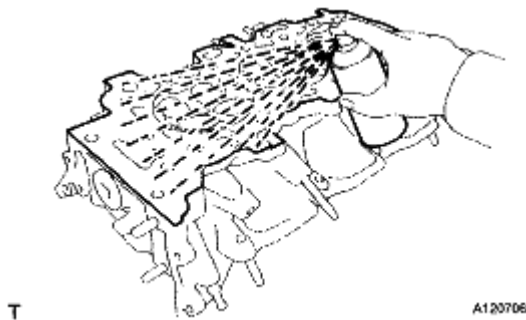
Checking Intake Ports, Exhaust Ports & Cylinder Surface For Cracks Using Dye Penetrant
